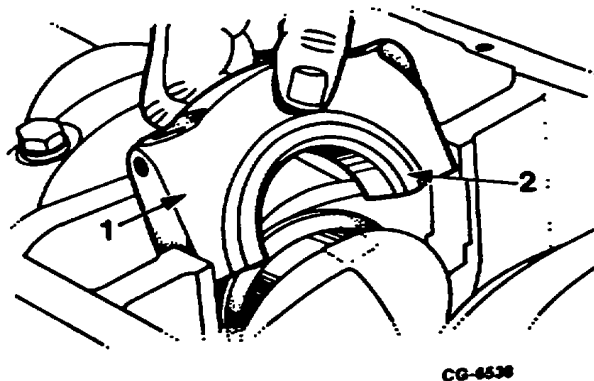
Main Bearing Cap with Thrust Flanges (No. 3)
